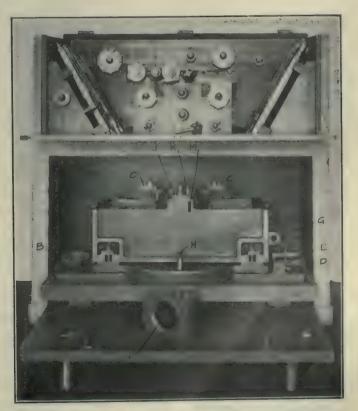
Boring Fixture for Spiral Head Swivel.
